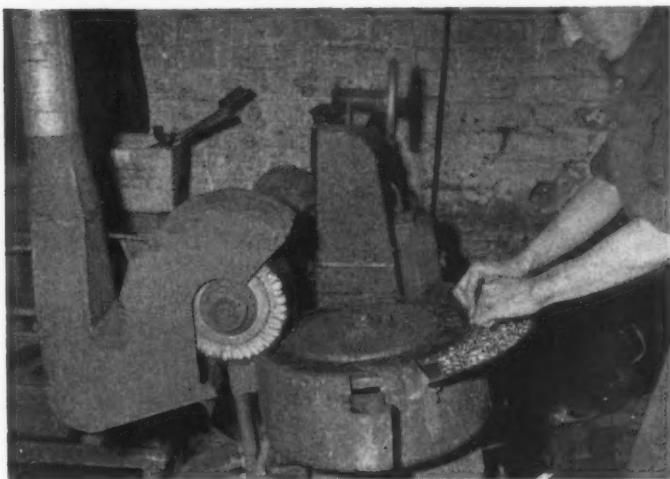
(left) Semi-automatic screw-head polishing machine.
